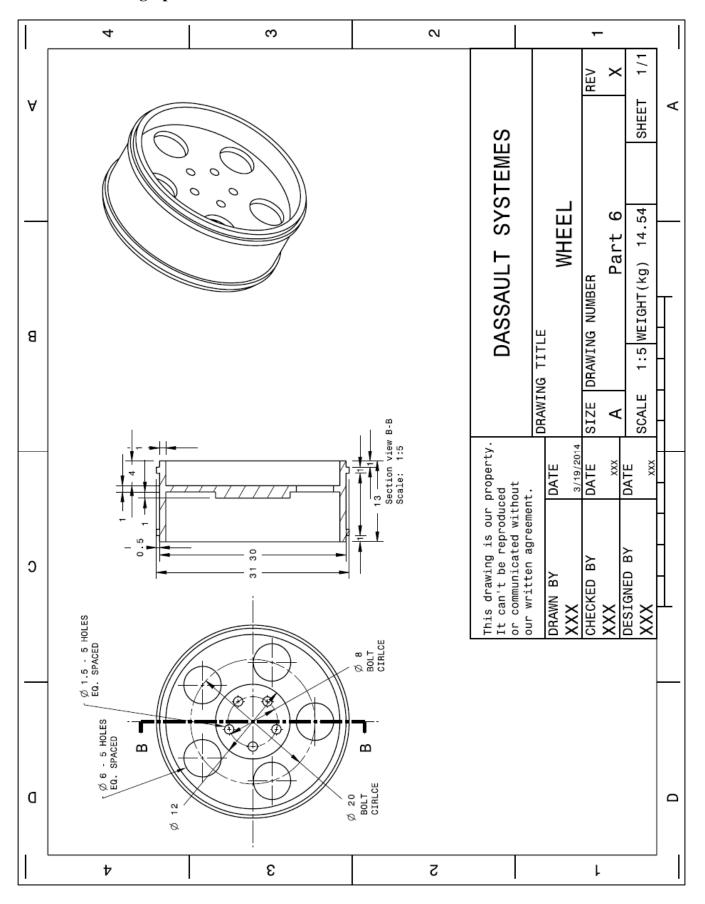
Wheel (Part 6) of the Steering Wheel Assembly in its isometric view with its materials applied (steel). This part is used twice.
